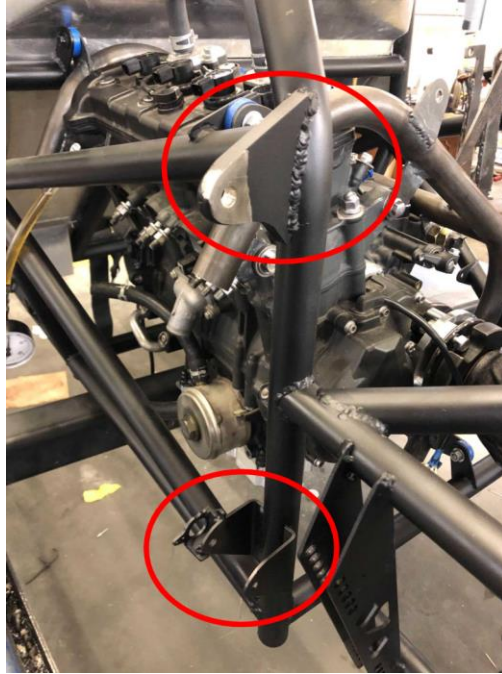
Welded mounting tabs for the rocker and linear actuator
